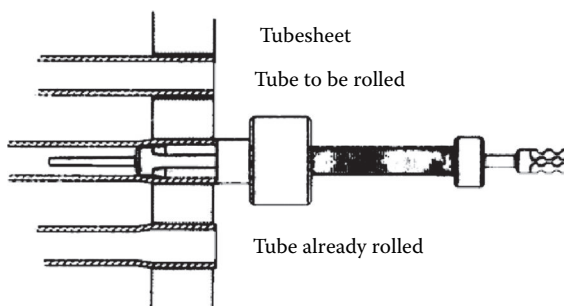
Sealing full length of tubesheet. (Courtesy of Elliott Tool Technologies Ltd, Dayton, OH.)
